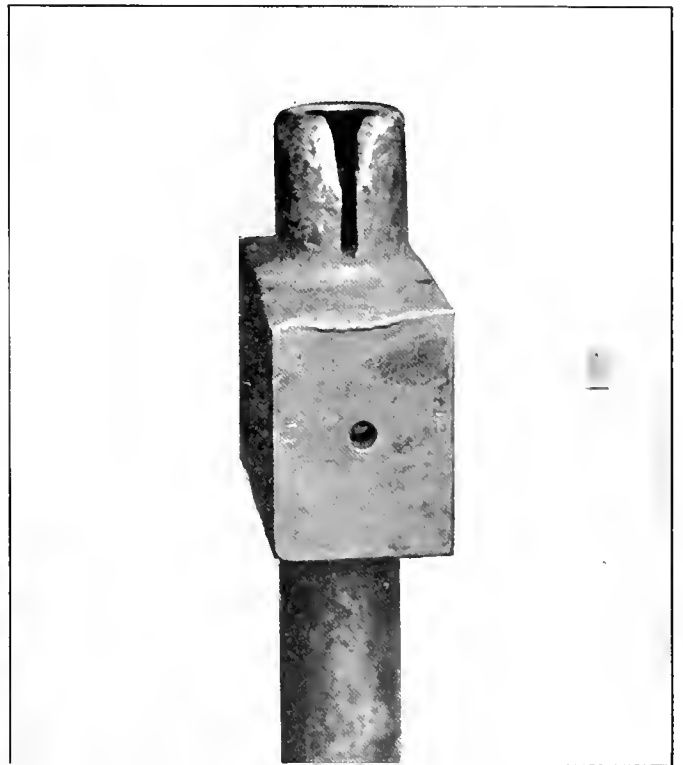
Crack Chipped in Valve Rod Guide Preparatory to Welding.
